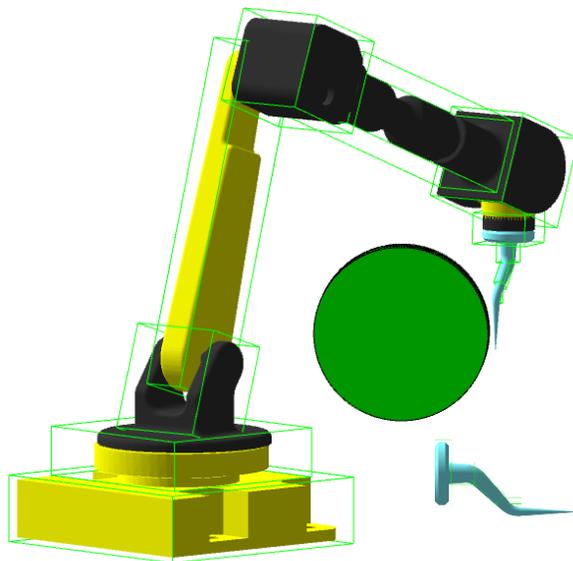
The robot is shown with the part that is grinded on the grinding wheel by rotating using tool frame created.
